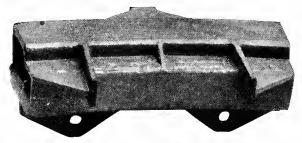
Susemihl Side Bearing for Six-Wheel Passenger Train Car Trucks.
